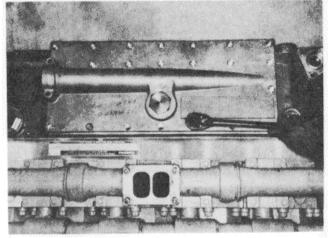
B-13. Remove the Lubricating Oil Cooler Cover Plate
